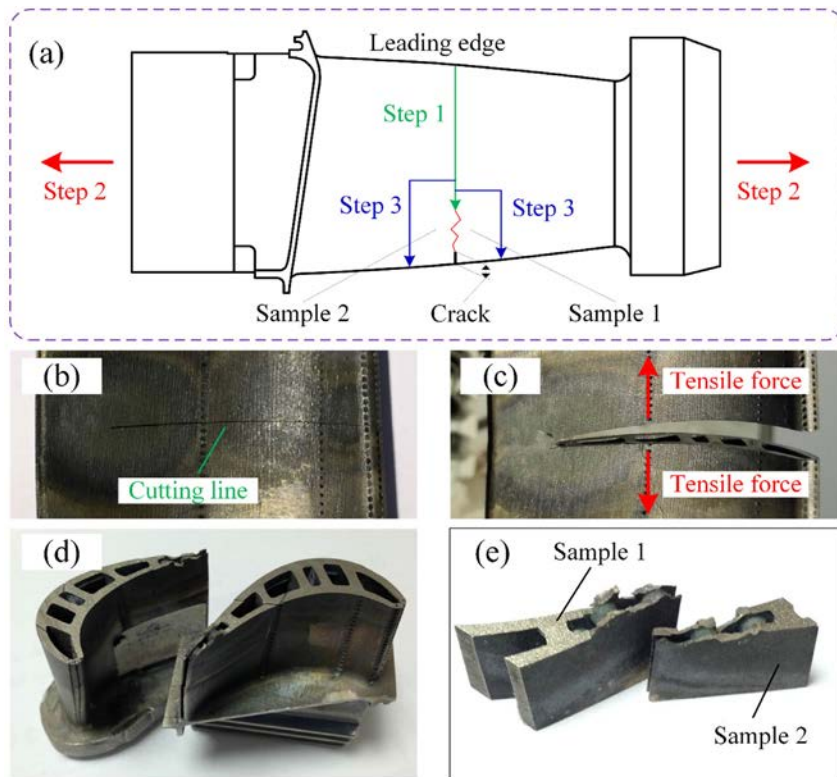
Sample preparation procedures: (a) the overall procedure illustration; (b) the incised specimen; (c) the incised specimen was pulled open by the test machine; (d) the specimen was separated with crack surface preserved; (e) the prepared samples.
